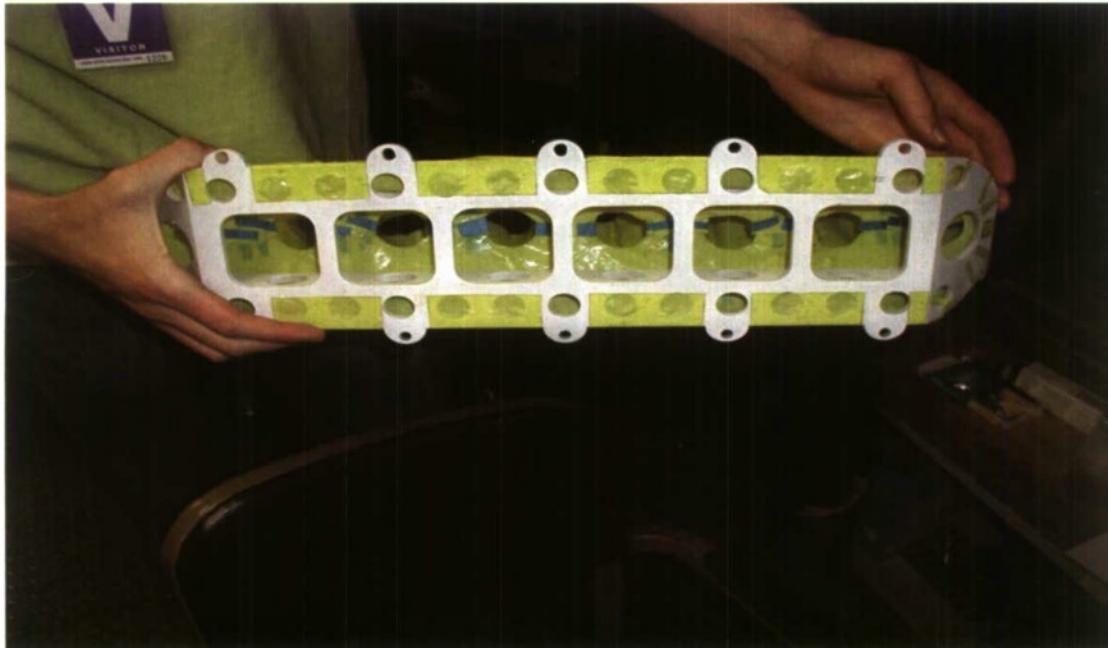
Photograph of the transverse seal skirt showing details of the stereo lithography apparatus (SLA) fabricated framework
